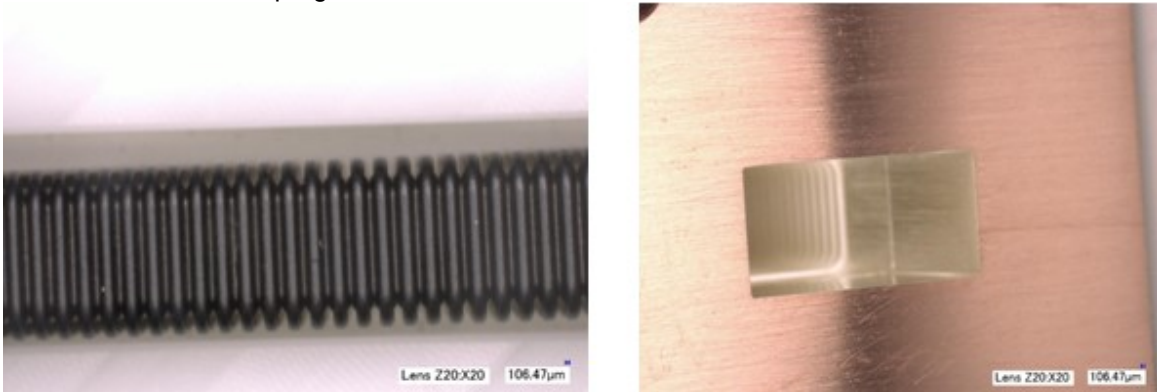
Visual Inspection of Exterior Surfaces
